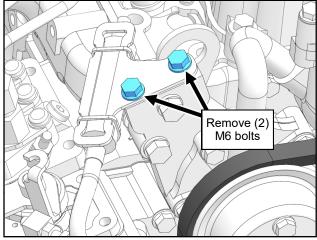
(Remove M6 bolts from Tie-down plate)
